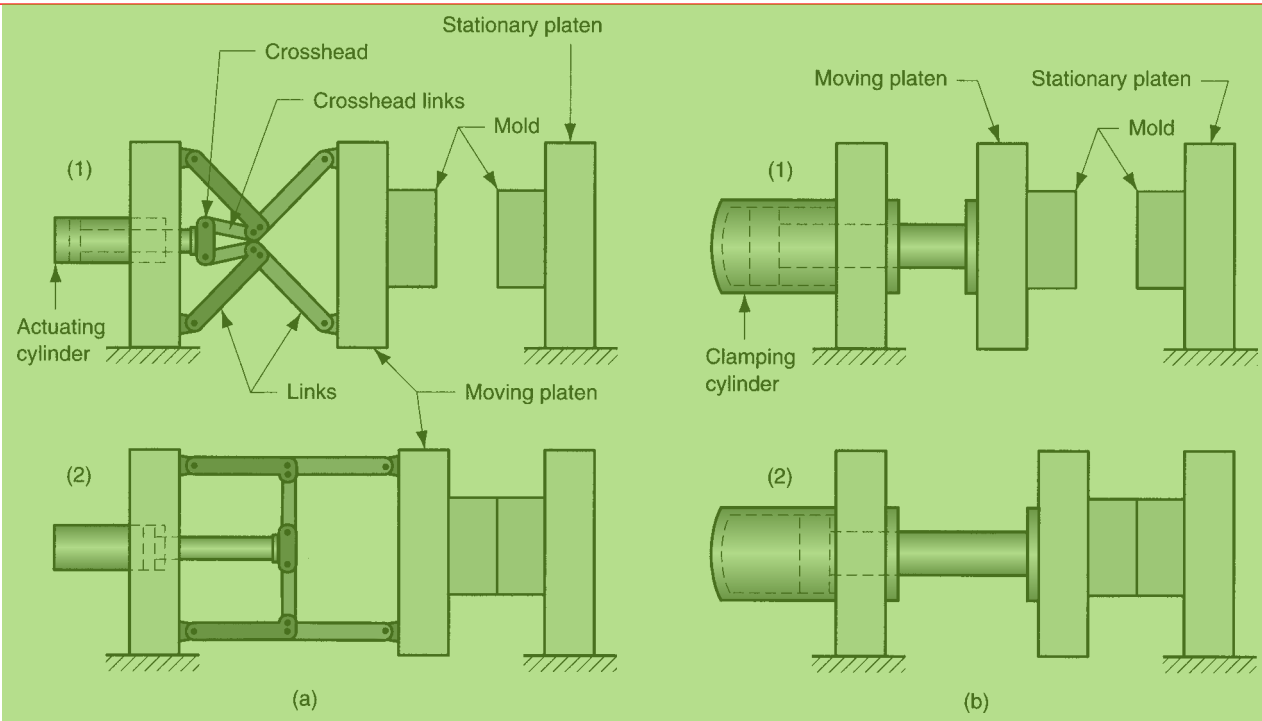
Two clamping designs: (a) one possible toggle clamp design: (1) open and (2) closed; and (b) hydraulic clamping: (1) open, and (2) closed. Tie rods used to guide moving platens not shown.
